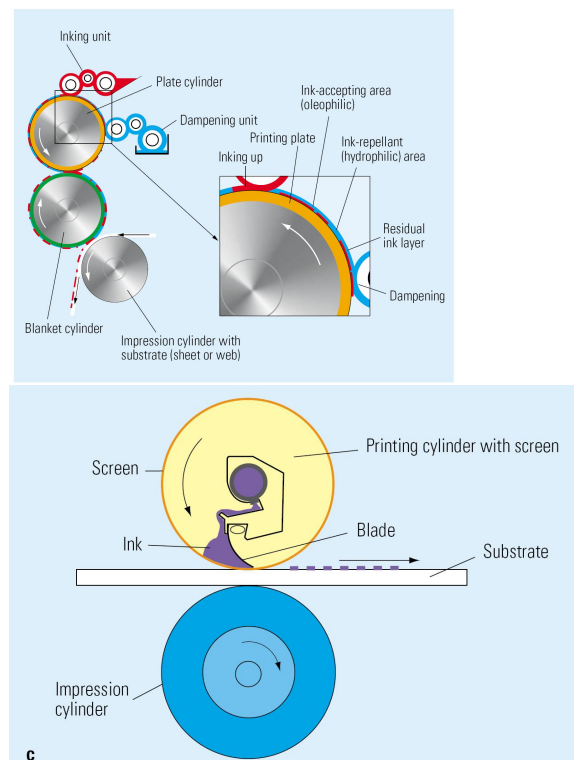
Operating principles of offset (left) and rotary screen (right) printing [3].
